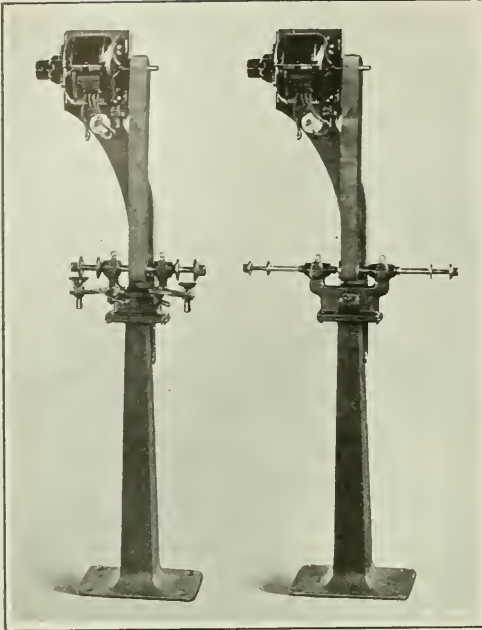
Grinding and Polishing Machines of a Line brought out by the St. Louis Machine Tool Co.
